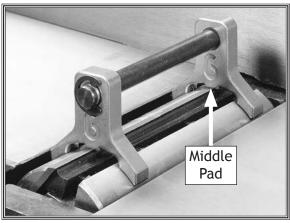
Example of knife-setting jig positioned over cutterhead knife.
